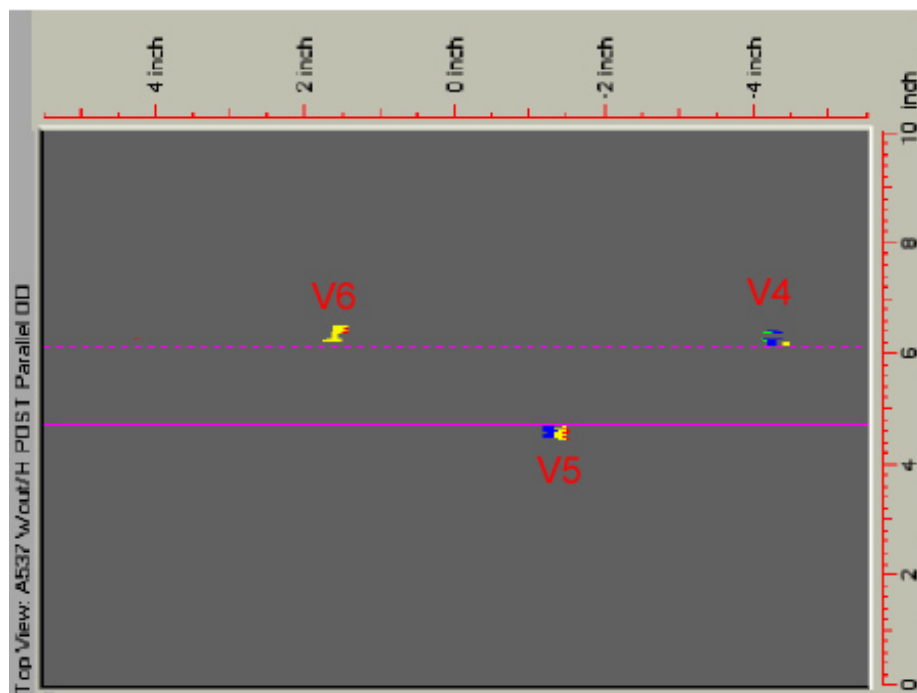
P-scan for stress corrosion cracking perpendicular to the weld for the as-welded plate.
